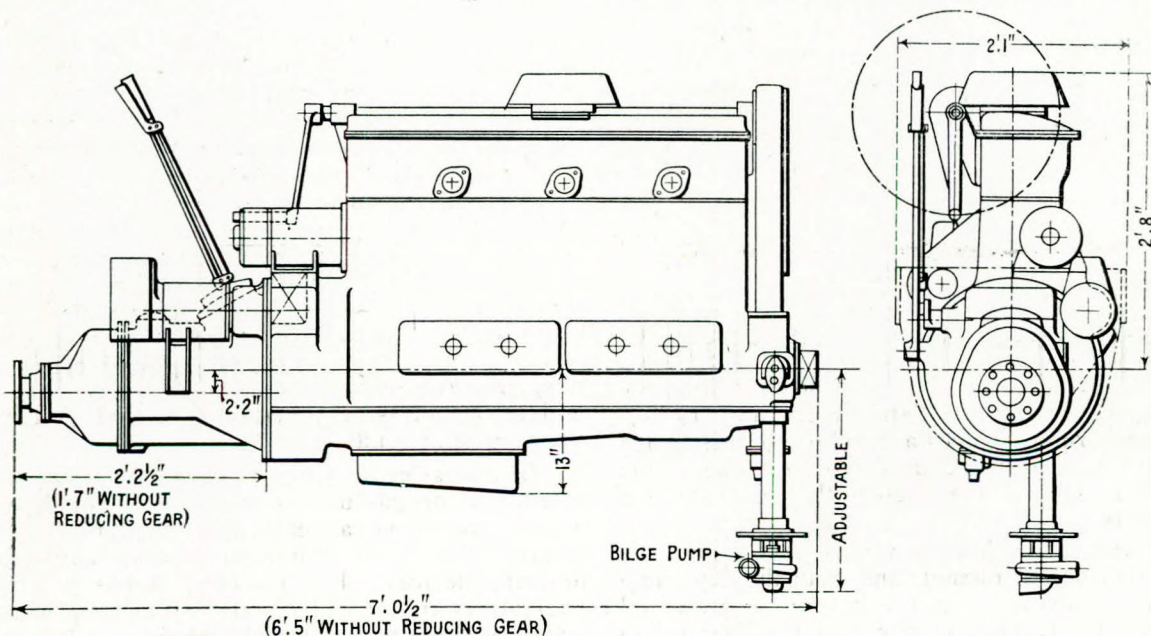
Beardmore Marine Diesel Engine with Reversing Speed Reduction Gear.
